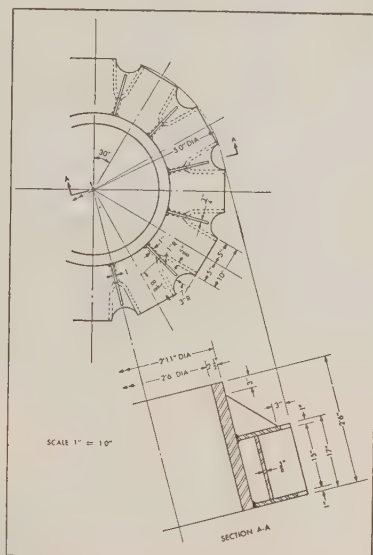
DETAIL OF CONSTRUCTION OF CENTER HUB ON PIECE SHOWN IN FIG. 28
